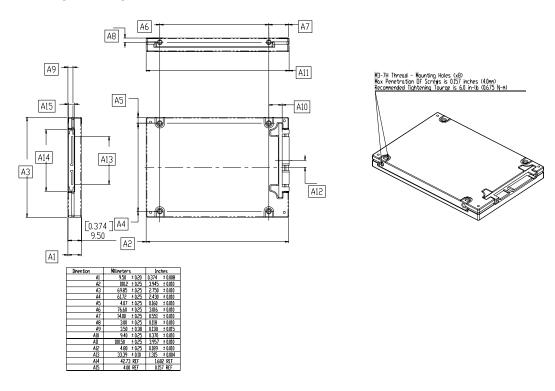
SanDisk SSD SATA 5000 2.5" Mechanical Drawing
